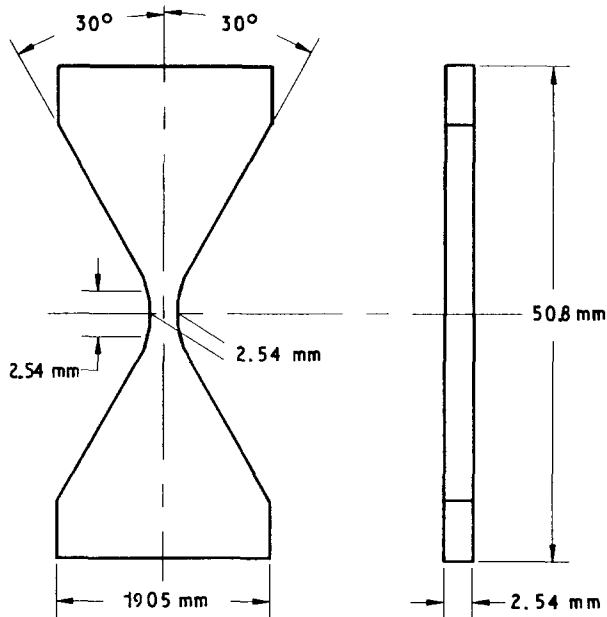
Flat subsized fatigue specimen (dimensions in mm).
